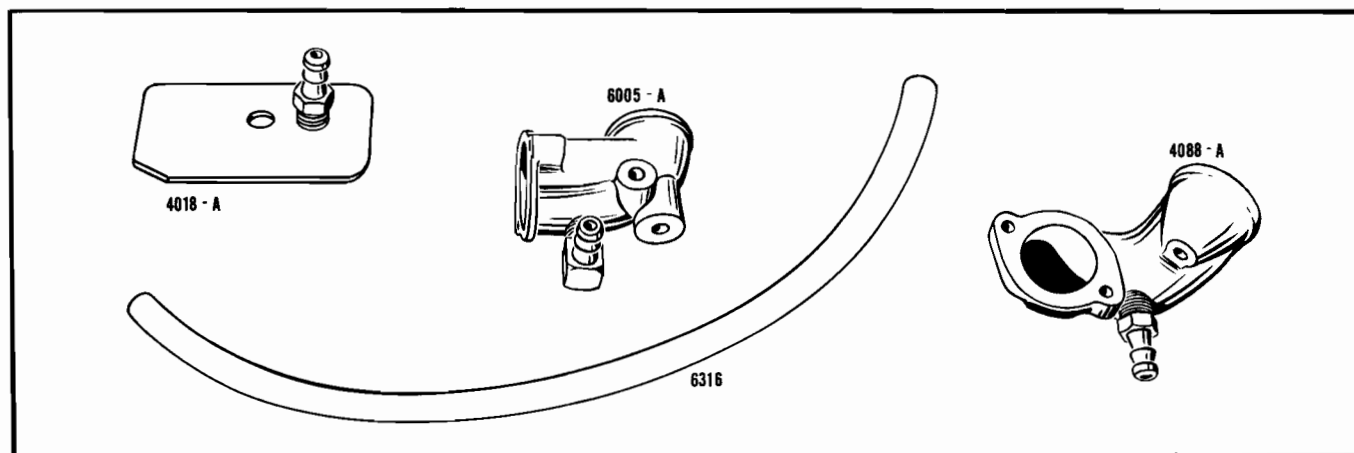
Breather Tube Parts—B-700, A-800 & D-1100
